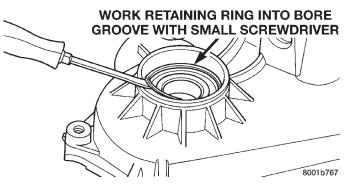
Installing Output Shaft Front Bearing Retaining Ring
